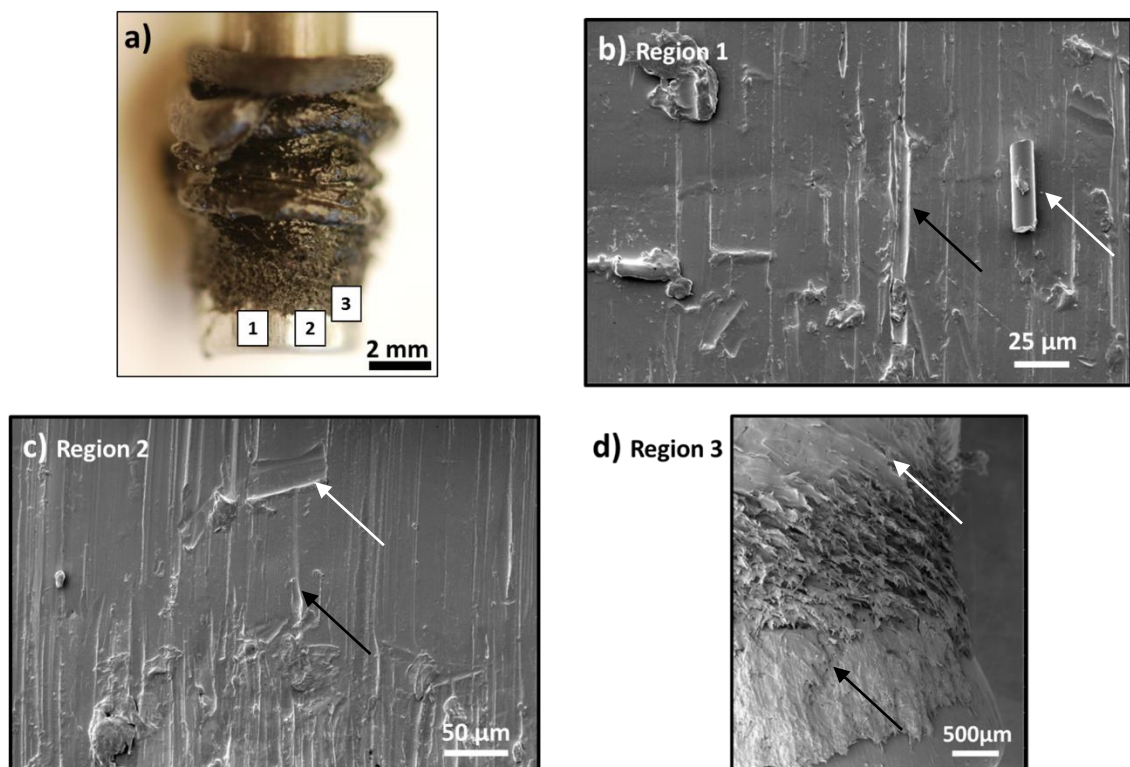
SEM images of fracture surfaces of the AA6056 rivet being fully pulled out from the polymer composite plate. Joint produced with condition C9 (RS: 15000 rpm, DaF: 9 mm and JF: 1900 N).
